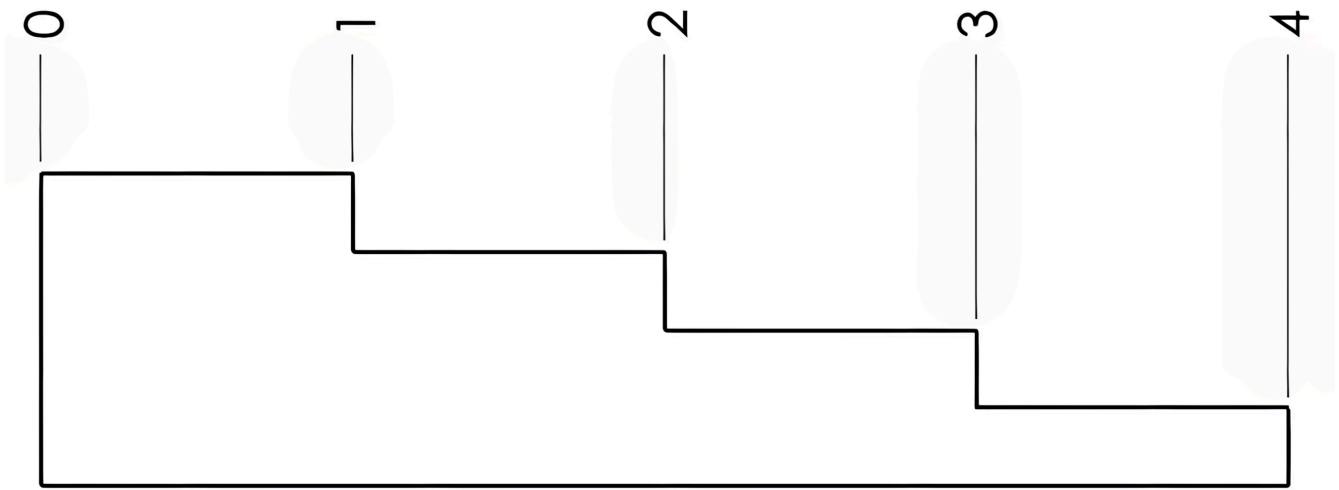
Arrowless dimensioning omits the dimension lines.
